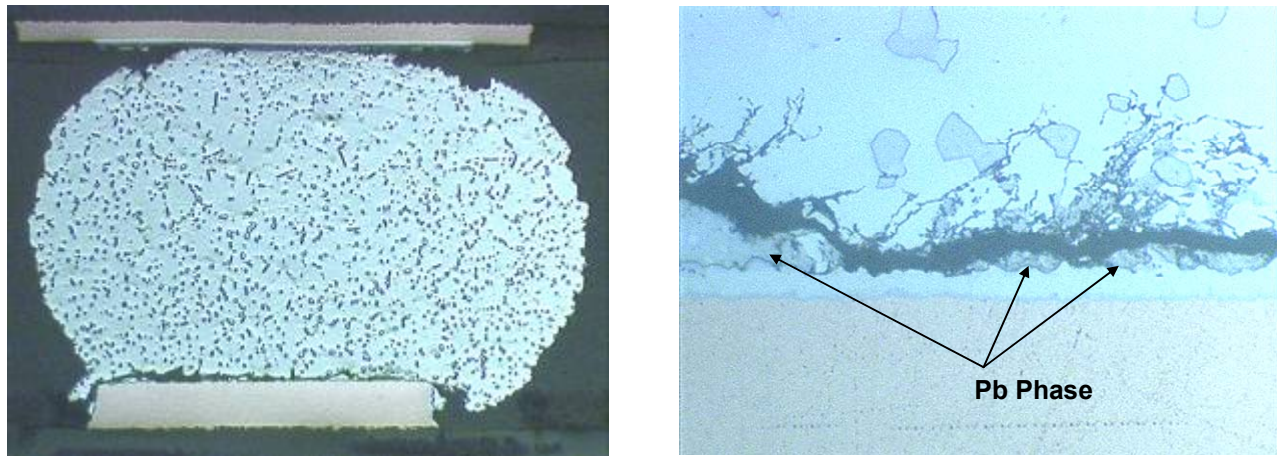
(left) BGA-225 SAC-SAC solder joint; (right) magnified view of crack with Pb phase present
